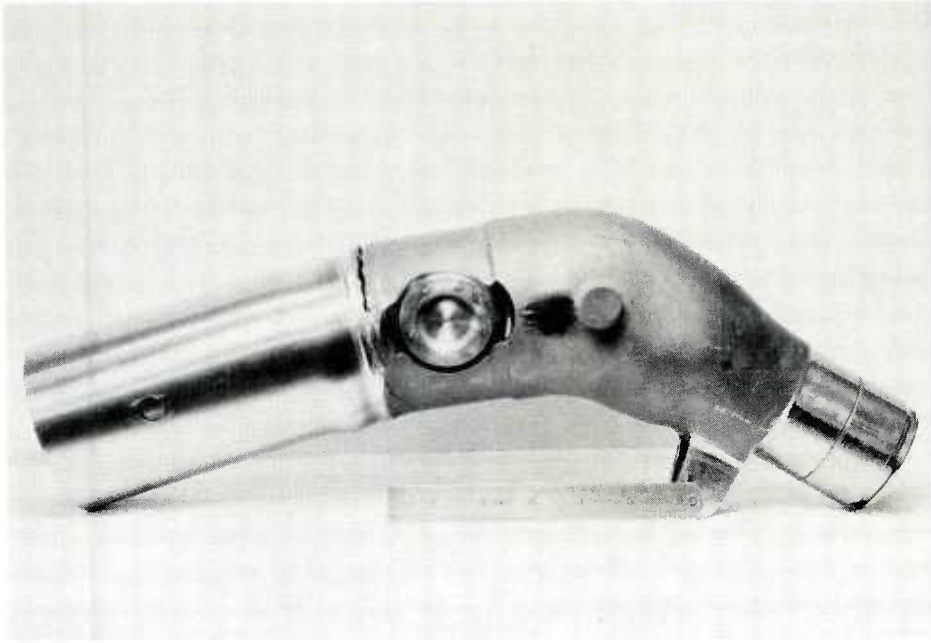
RESULT OF STATIC TEST MADE ON TITANIUM CASTING EB WELDED TO WROUGHT TITANIUM
